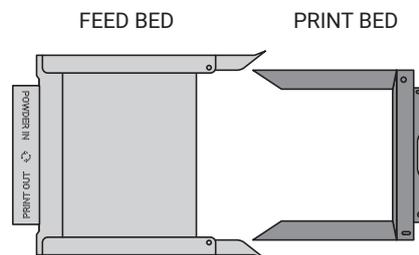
The proper arrangement of the IO BOX, allowing the user to remove the finished printout.
